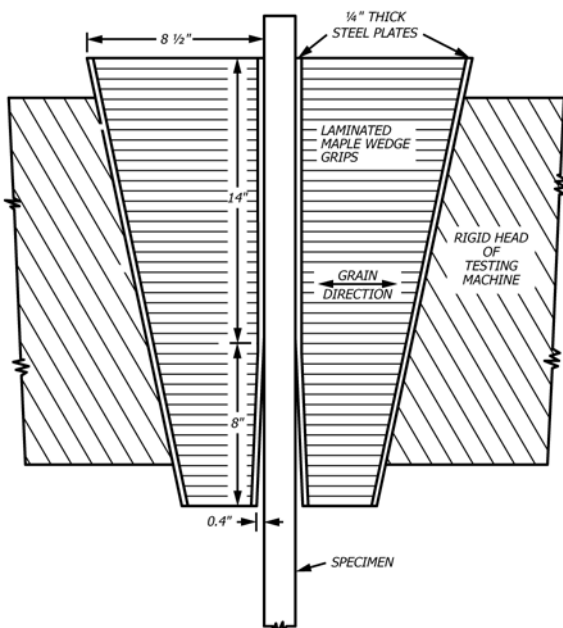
Side View of Wedge Grips Used to Anchor Full-Size, Structurally-Graded Tension Specimens
